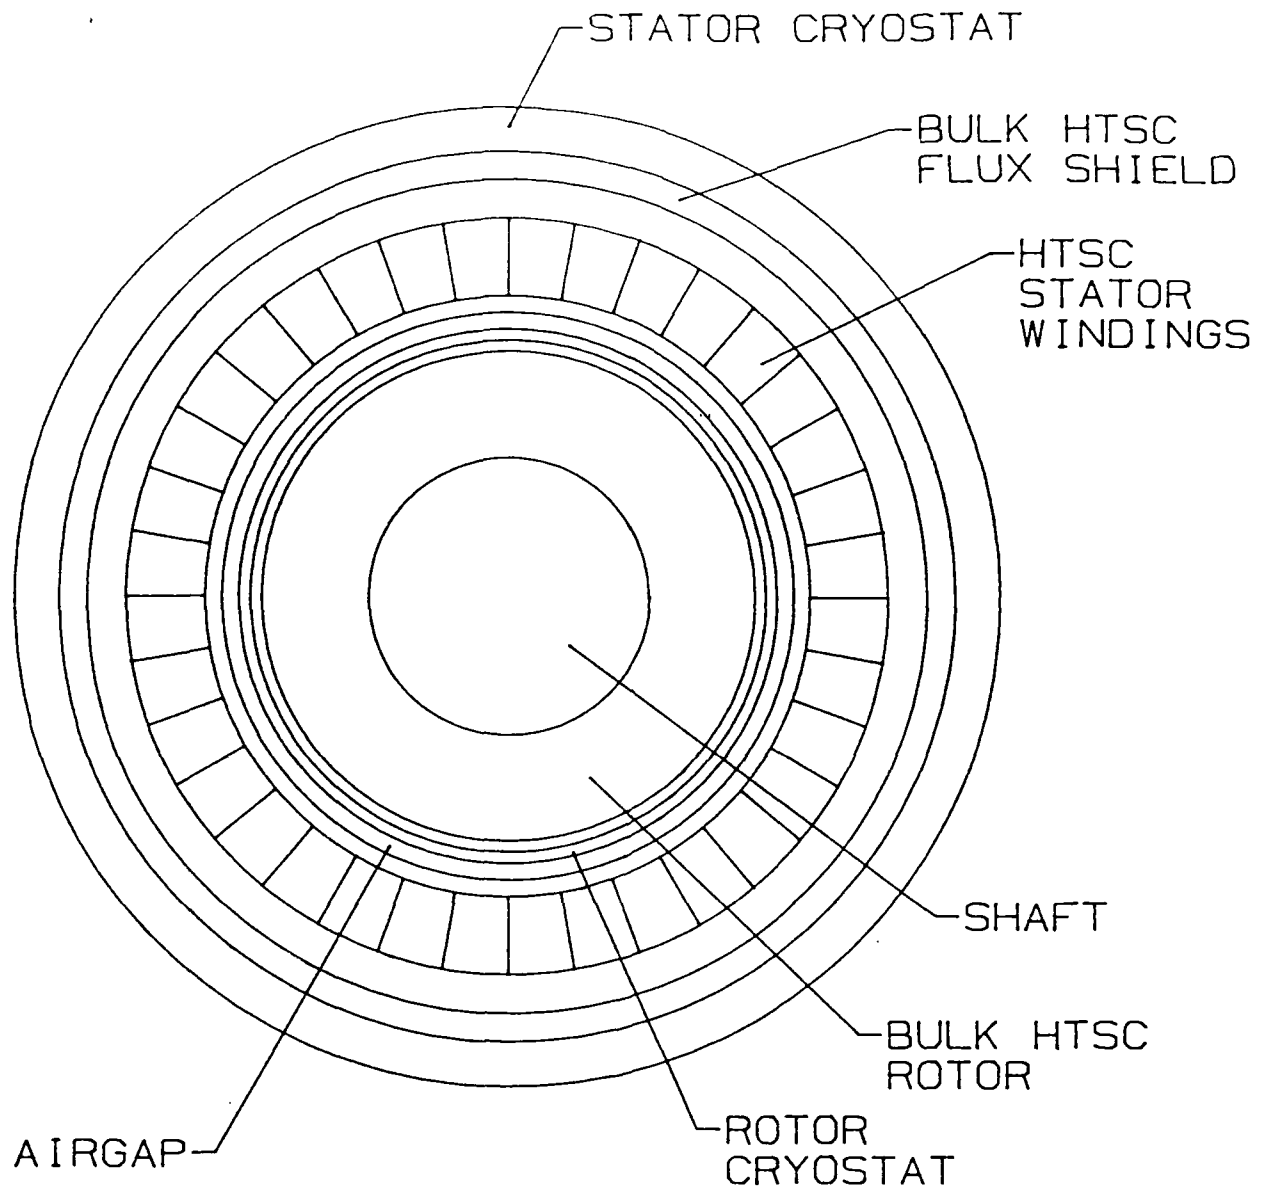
BRUSHLESS DC MOTOR WITH HTSC STATOR WINDINGS AND BULK HTSC ROTOR
